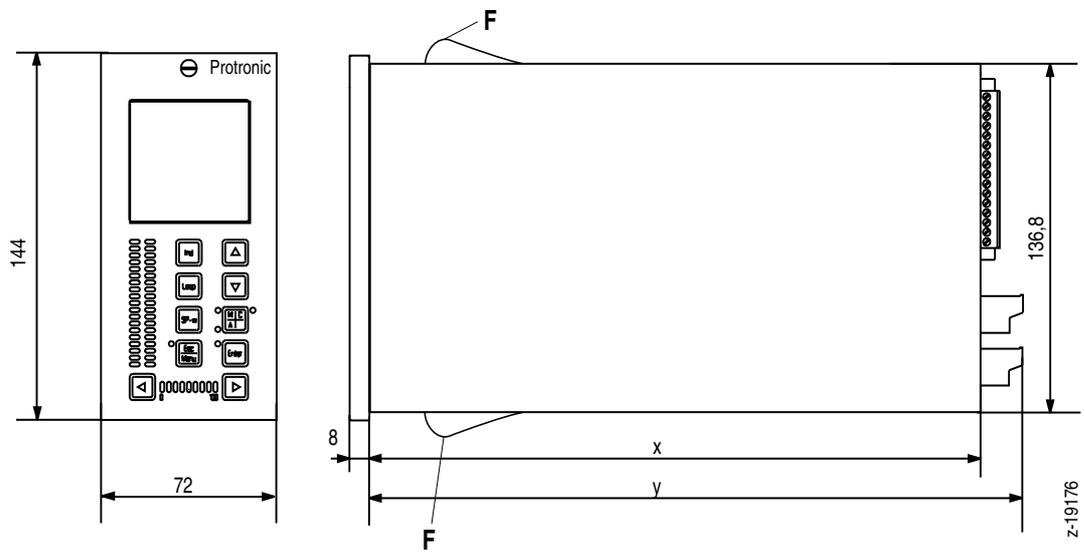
Dimensional drawing (dimensions in mm)
